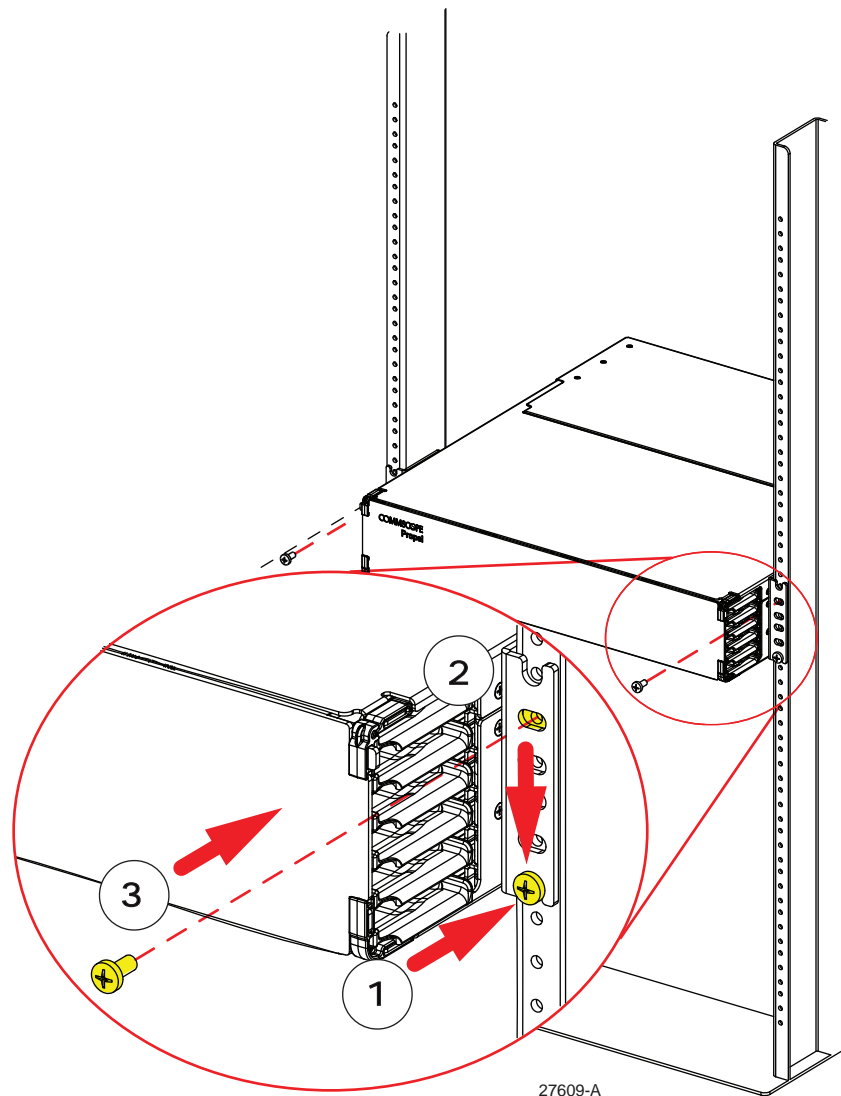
Mounting the Propel Panel (2RU Panel Shown)
